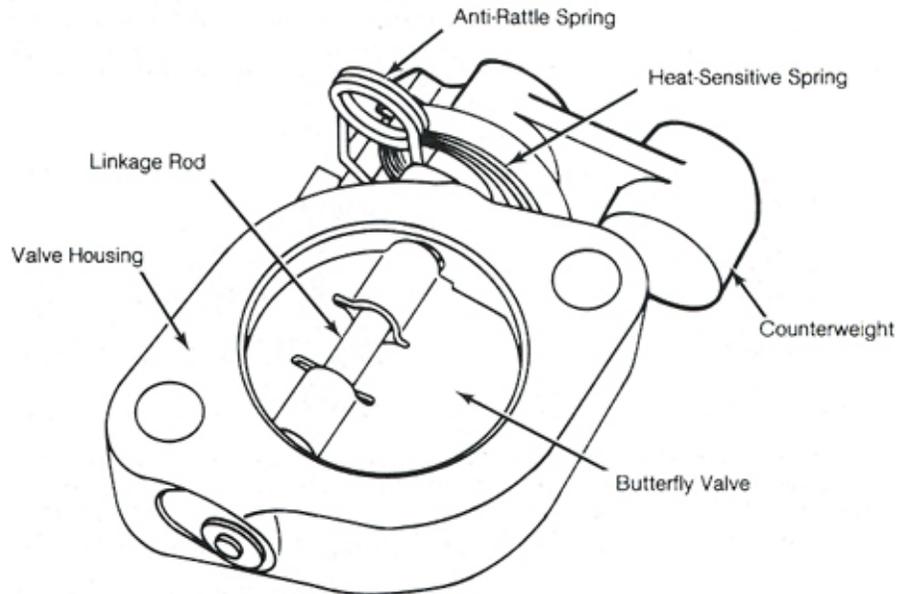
Valve Housing with Counter-Balanced Butterfly Valve
